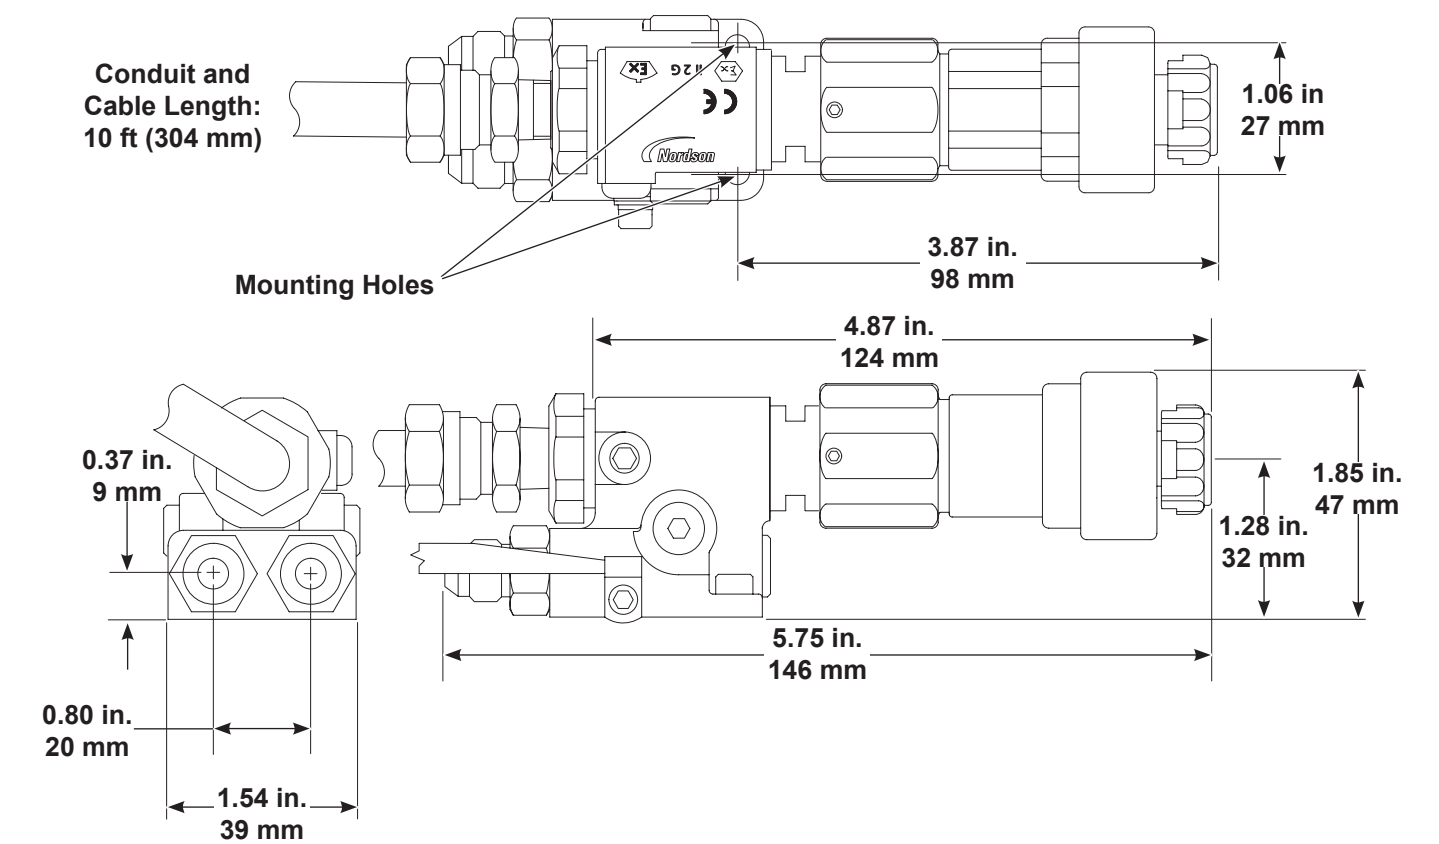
Gun Dimensions for Reduced Cavity Spray Guns
